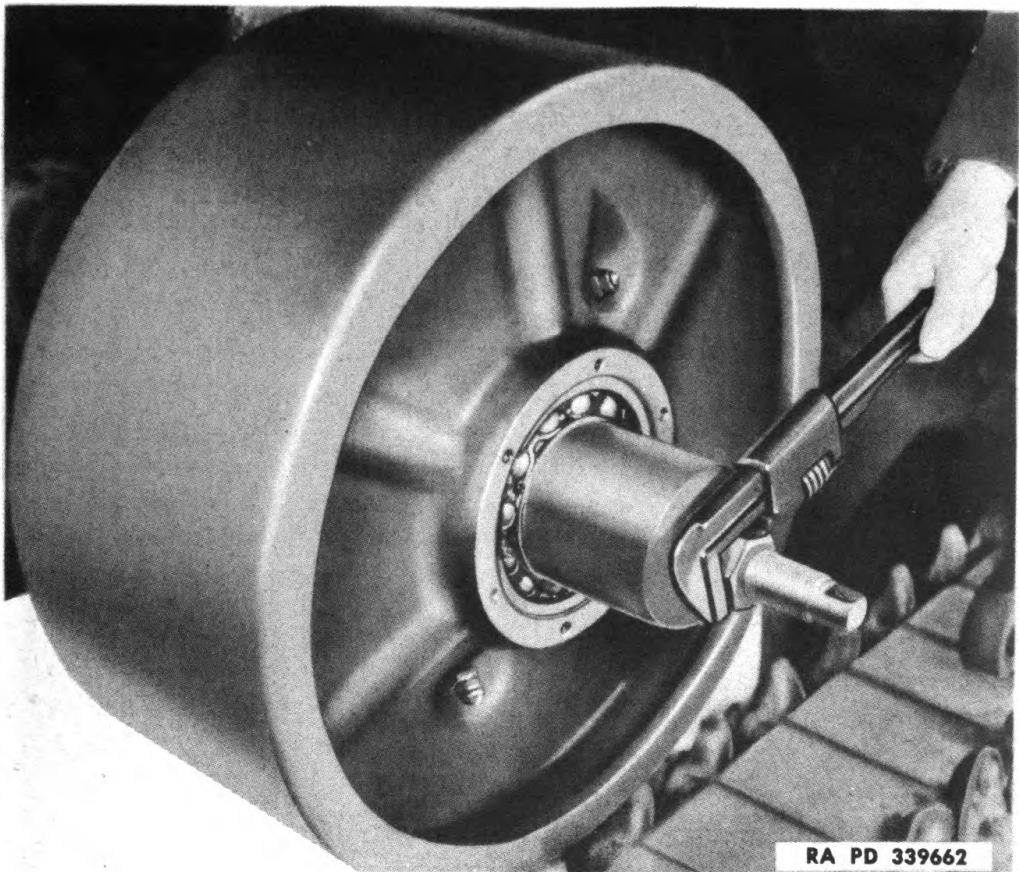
Installing Pilot of Tool (41-T-3216-150) on Rear Idler Wheel Spindle
